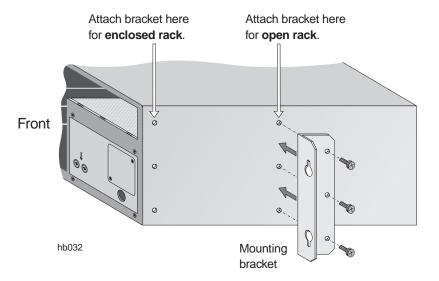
Attaching rack mounting brackets to the IDU chassis
